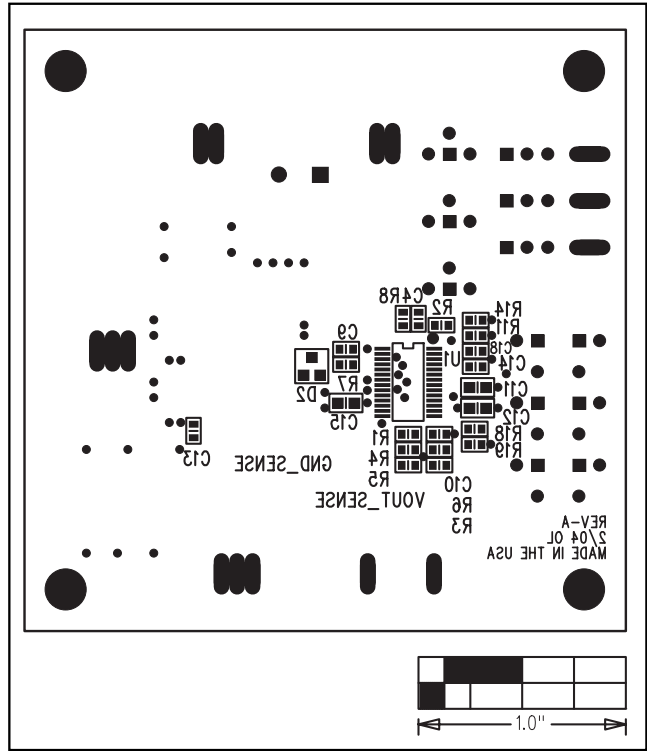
MAX8720 EV Kit Component Placement Guide—Solder Side
